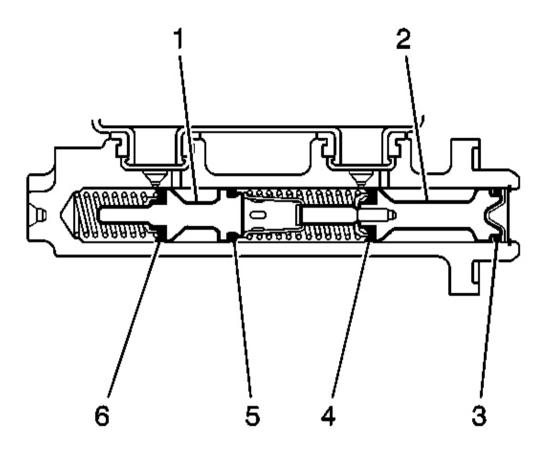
Identifying Master Cylinder Components Courtesy of GENERAL MOTORS CORP.
